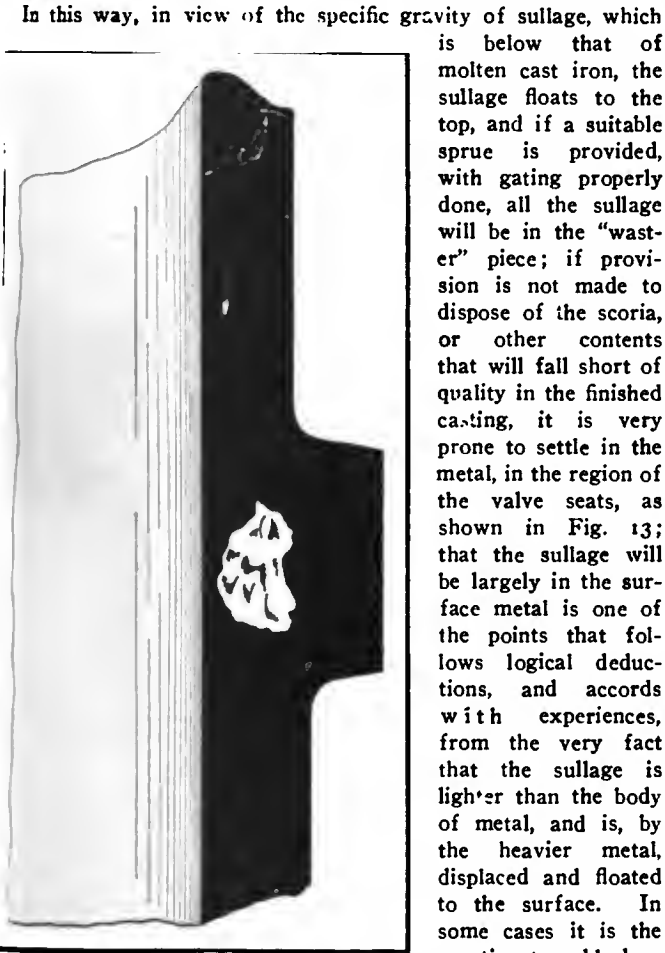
Section at oil-boss indicating shrink hole due to presence of excess metal in boss
